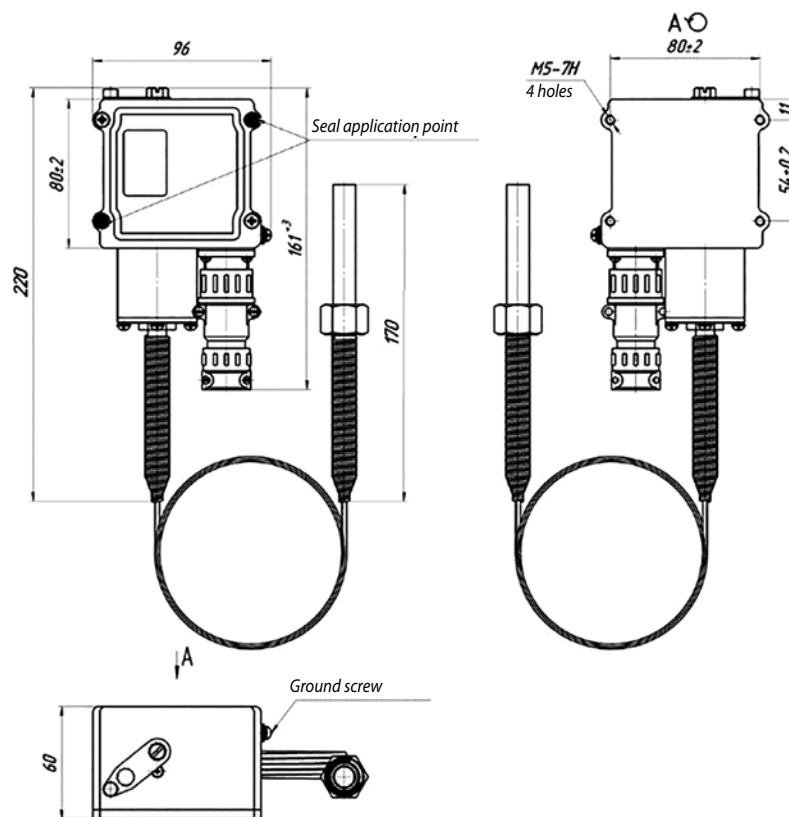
Overall and mounting dimensions of TAM-102C temperature relay-sensors version with setpoint range "4", "5" with 2PTT, ШП type connector
